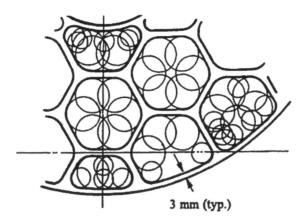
Typical core machining hole pattern for a mirror such as that shown in Fig. 8.27. (From Pepi and Wollensak.²³)
